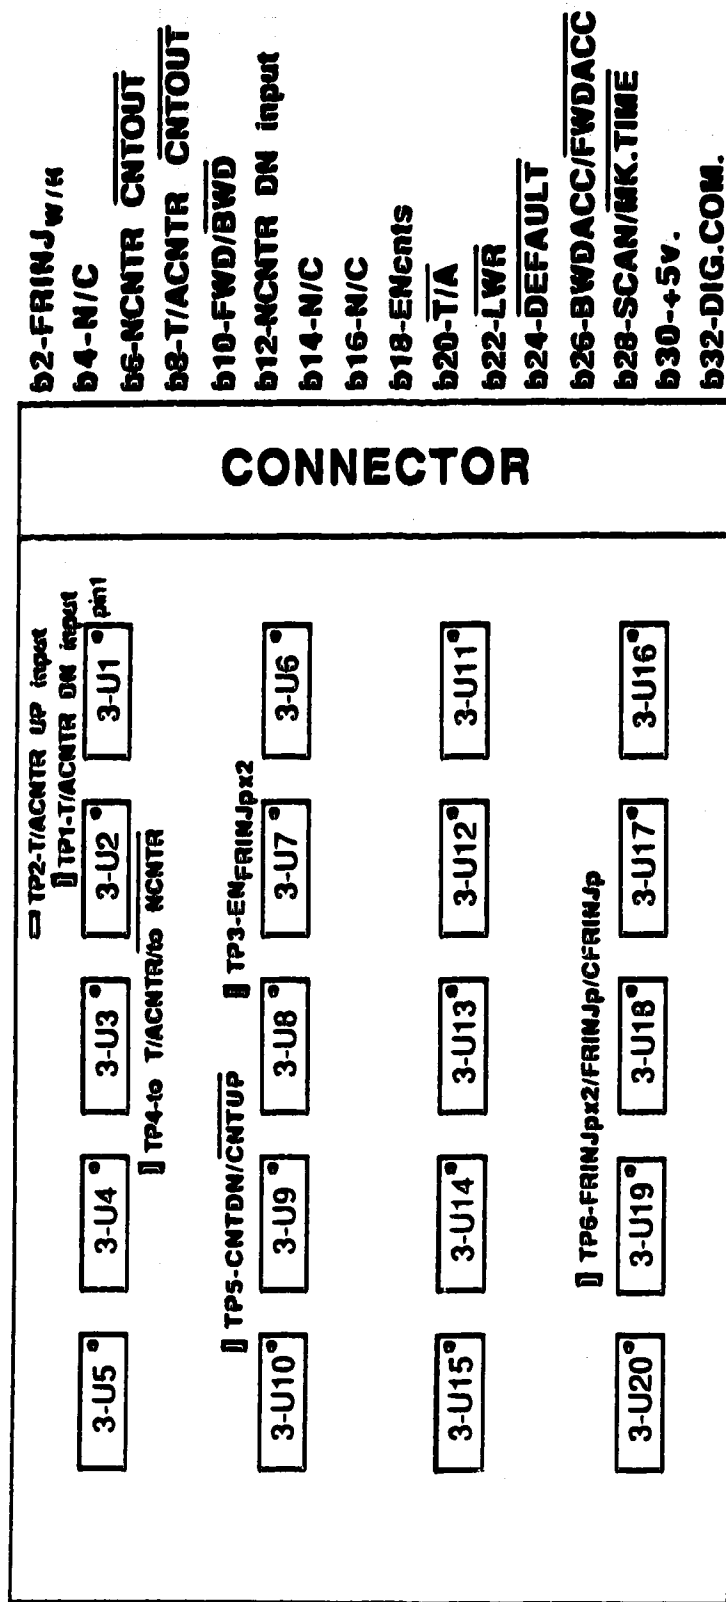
T/A CNTR board IC/test points/connector assignments.
